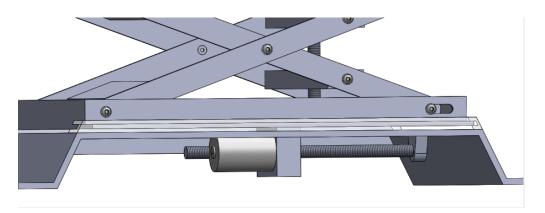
Closer View of Horizontal Motion Showing Sliders and Motor
